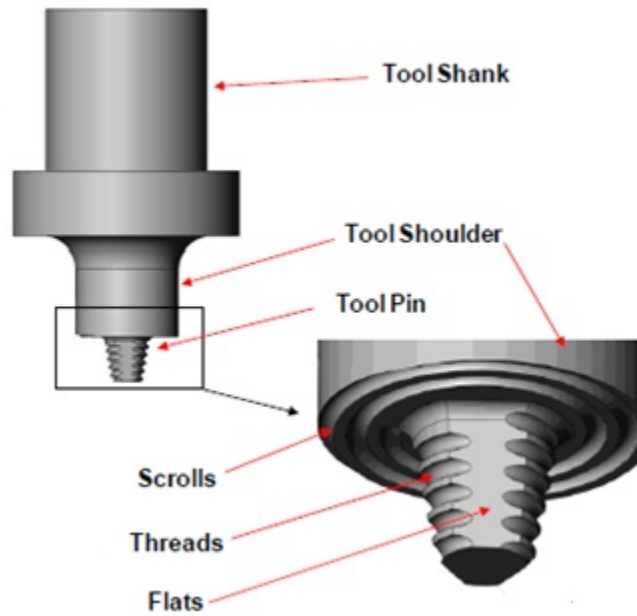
FSW tool. The tool shoulder is butted against the workpiece and the tool is rotated as it advances. This process mechanically stirs the workpiece metals together at elevated temperature, but without melting.
